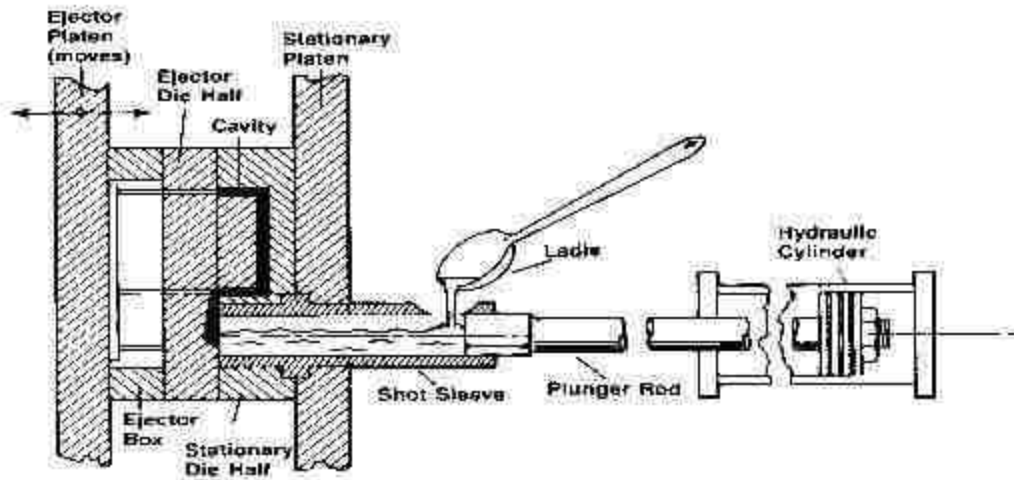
3. Schematic diagram of cold chamber die cast machine [16].
